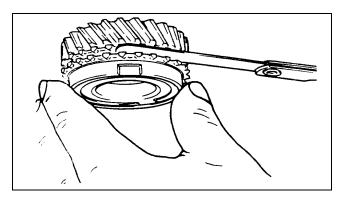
H-18. Synchronizer Ring-to-Gear Clearance
